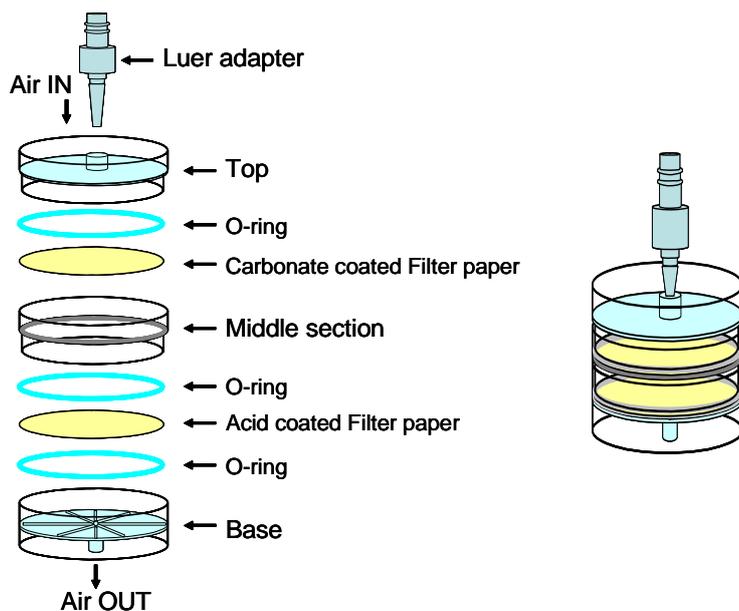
Exploded diagram of a 2-stage Millipore aerosol holder on LHS, showing the order in which the different components and coated filter papers are assembled. The assembled aerosol holder is shown on the RHS.
